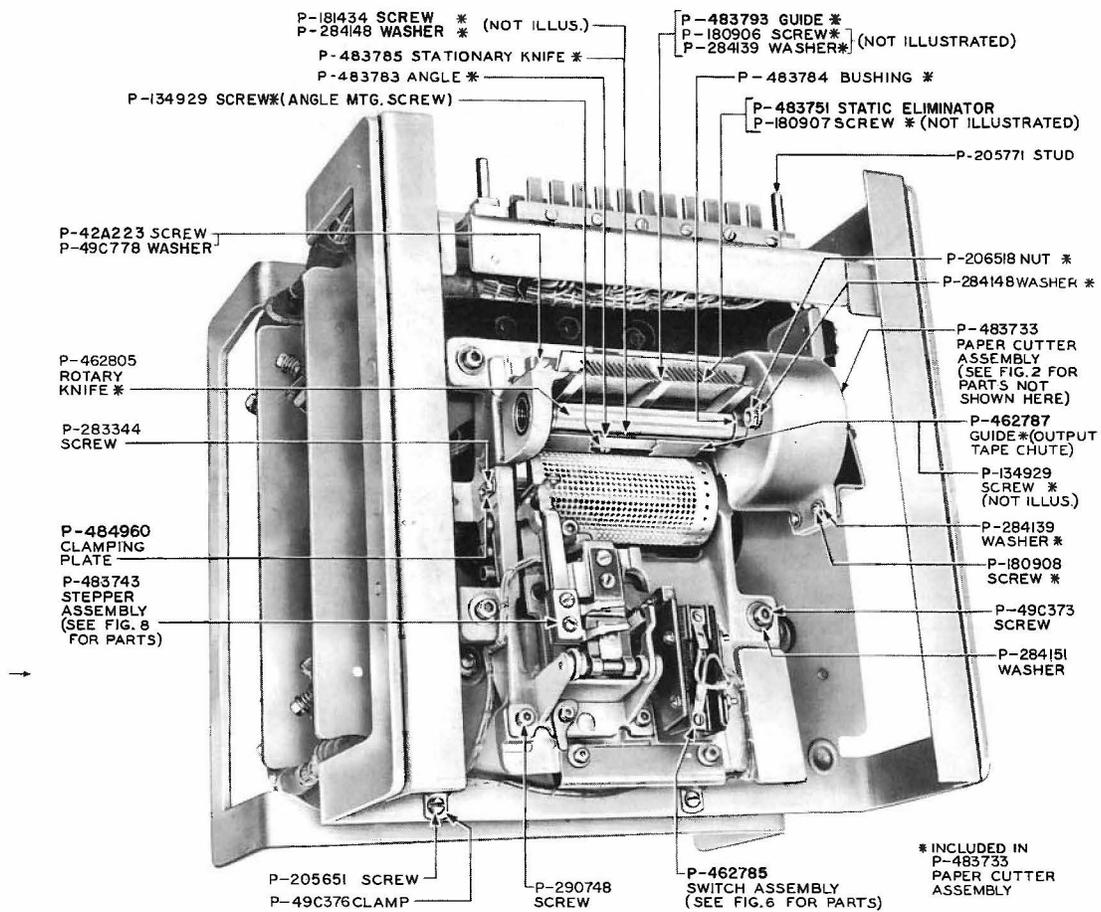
KS-13882 L1 and L3 Perforators — Bottom View
